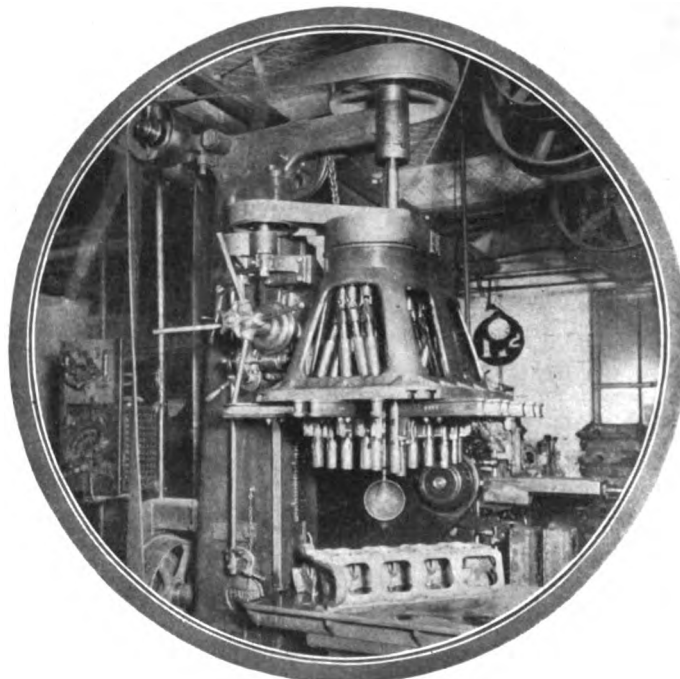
Type of multiple-spindle drill generally employed for motor castings
